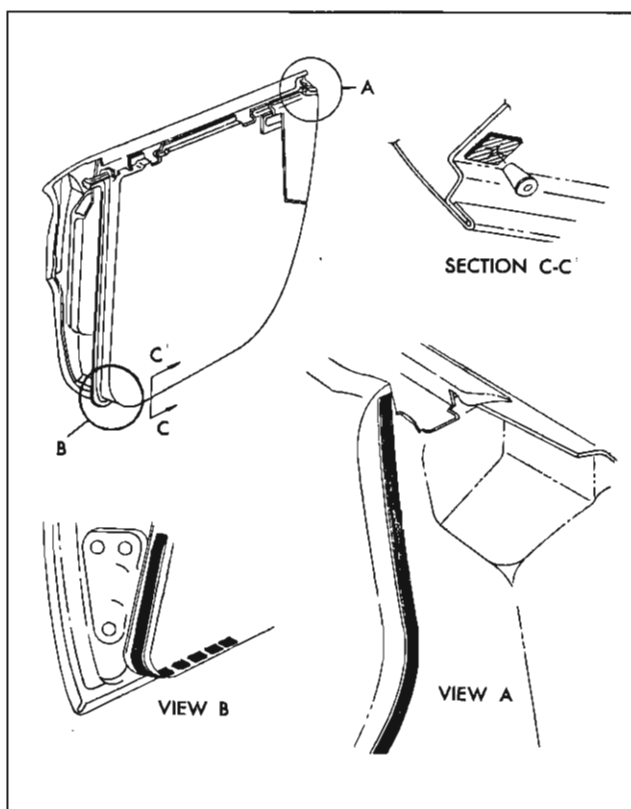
Weatherstrip Adhesive - Rear Door
